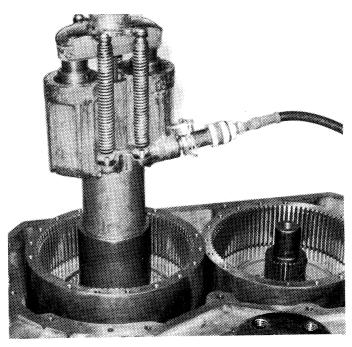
Installing Clutch Backplate and Drive Sleeve Assembly.
